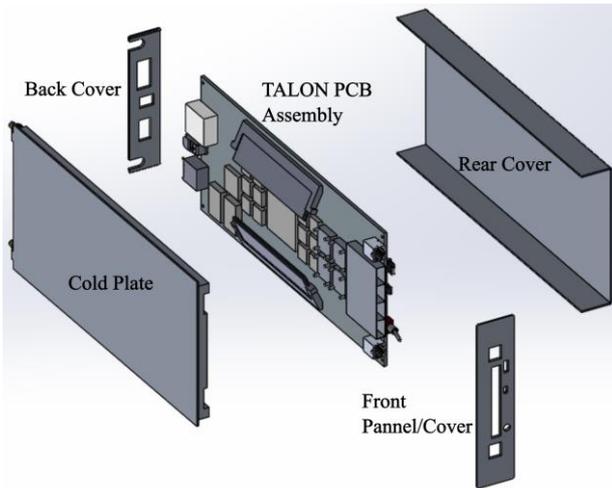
Assembly of a TALON LRU with the cover and the cold-plate.
